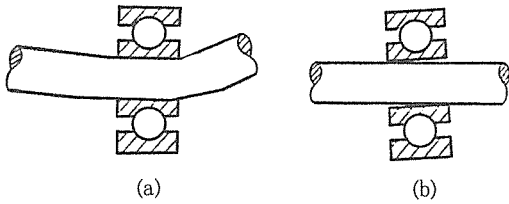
BENDING SHAFT AND MISALIGNED BEARING
